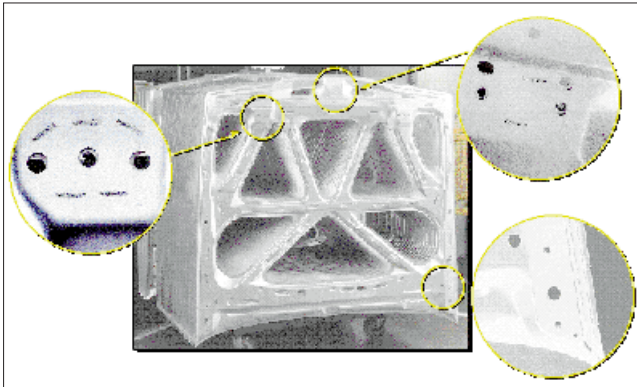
Laser welding of the Volvo 960 Series aluminium bonnet.
